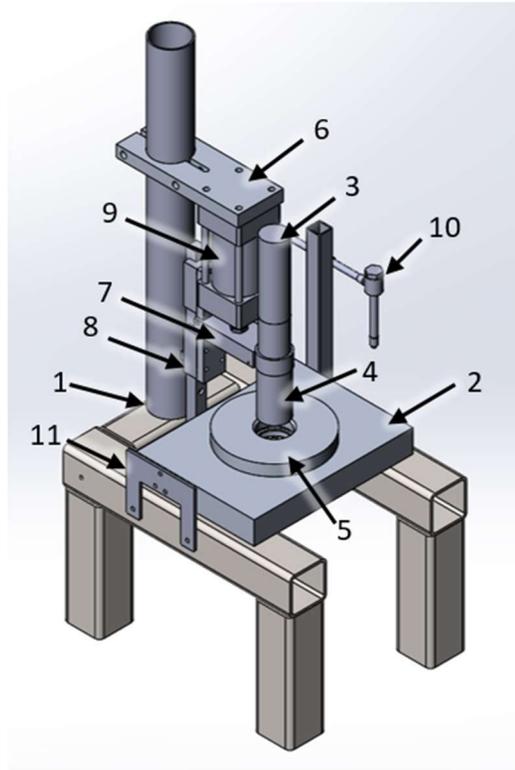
Solidworks® model of the apparatus assembly - (1) base support, (2) base, (3) transducer, (4) horn, (5) filler, (6) height adjustment, (7) nodal hold, (8) linear rail guide, (9) pneumatic cylinder, (10) vortex tube, (11) pneumatic control valve place.
